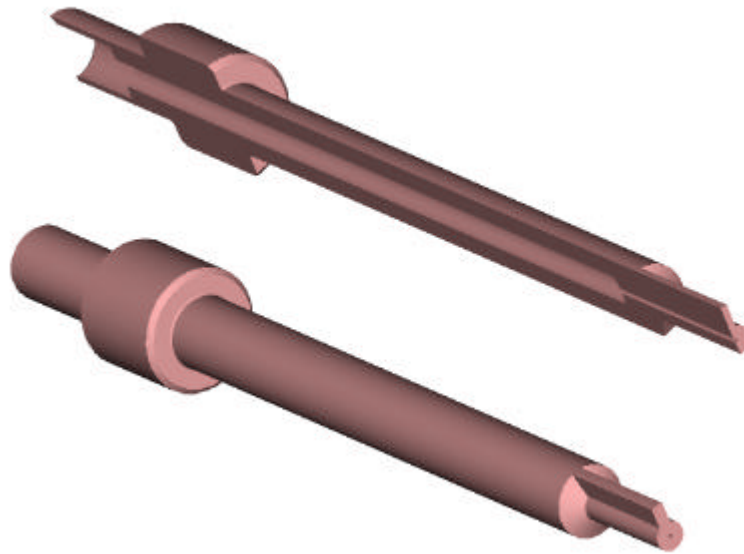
Prototype ceramic insulator body for surface-discharge plug
